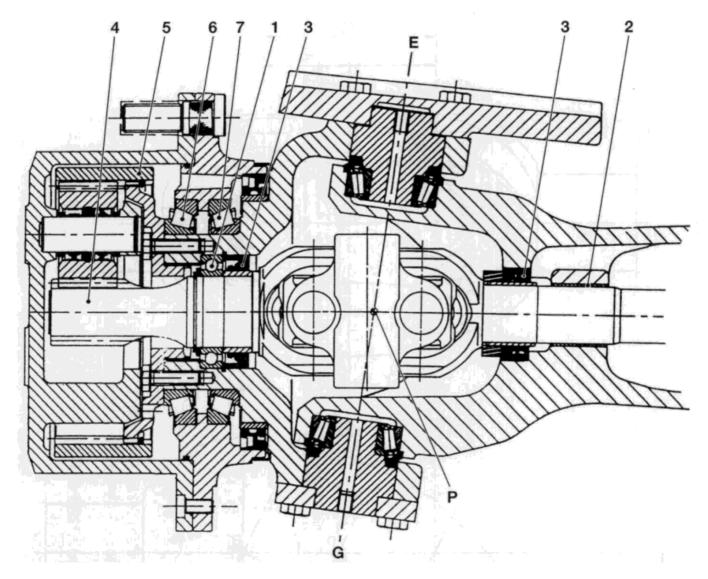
Driven, rigid steering axle with dual joint made by the company GKN – Birfield AG for four-wheel drive special-purpose vehicles, tractors and construction machinery.
